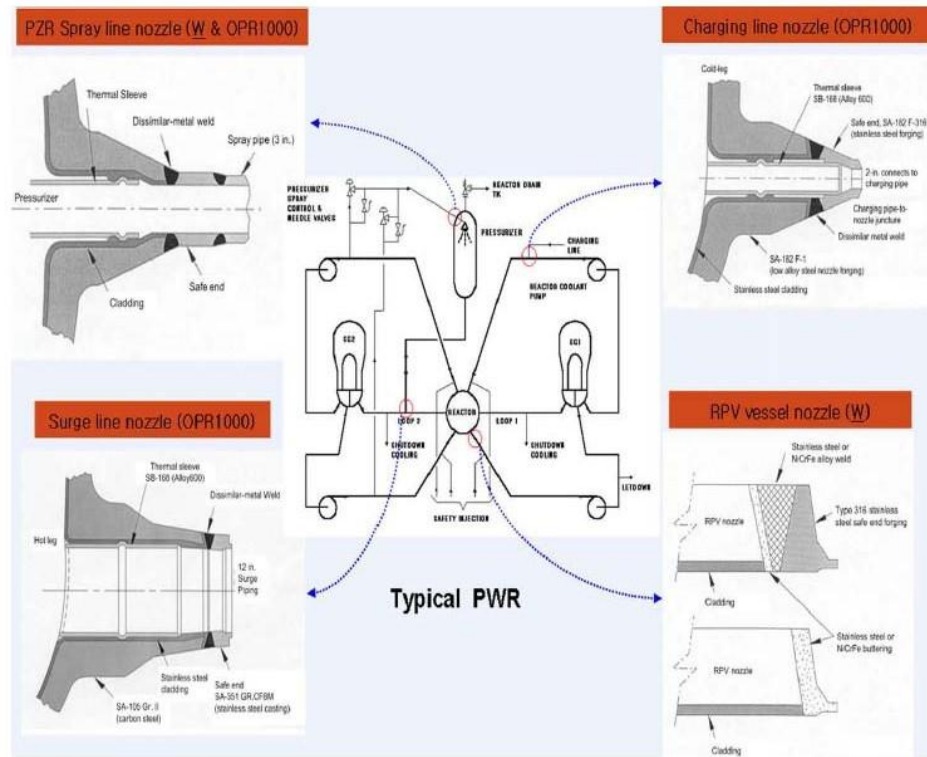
Locations of bimetallic weld in typical PWR
